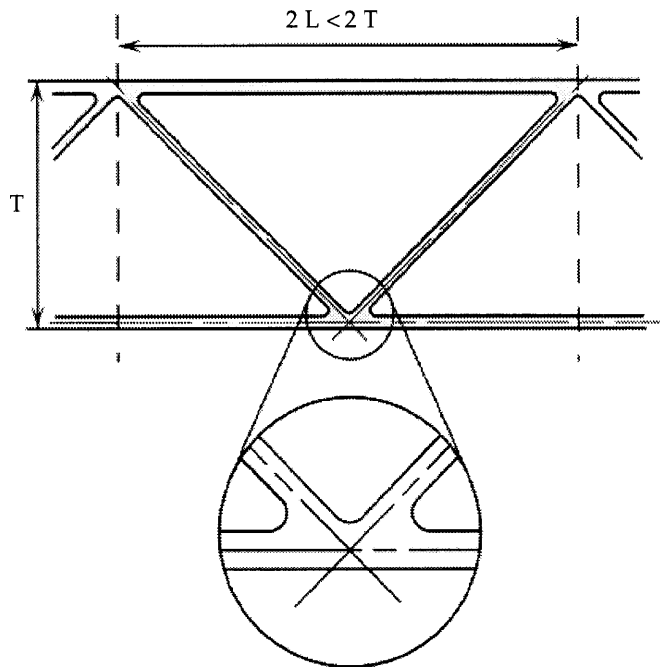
A standard truss features the midlines of the truss segments intersecting at the midline of the outer wall segment.
